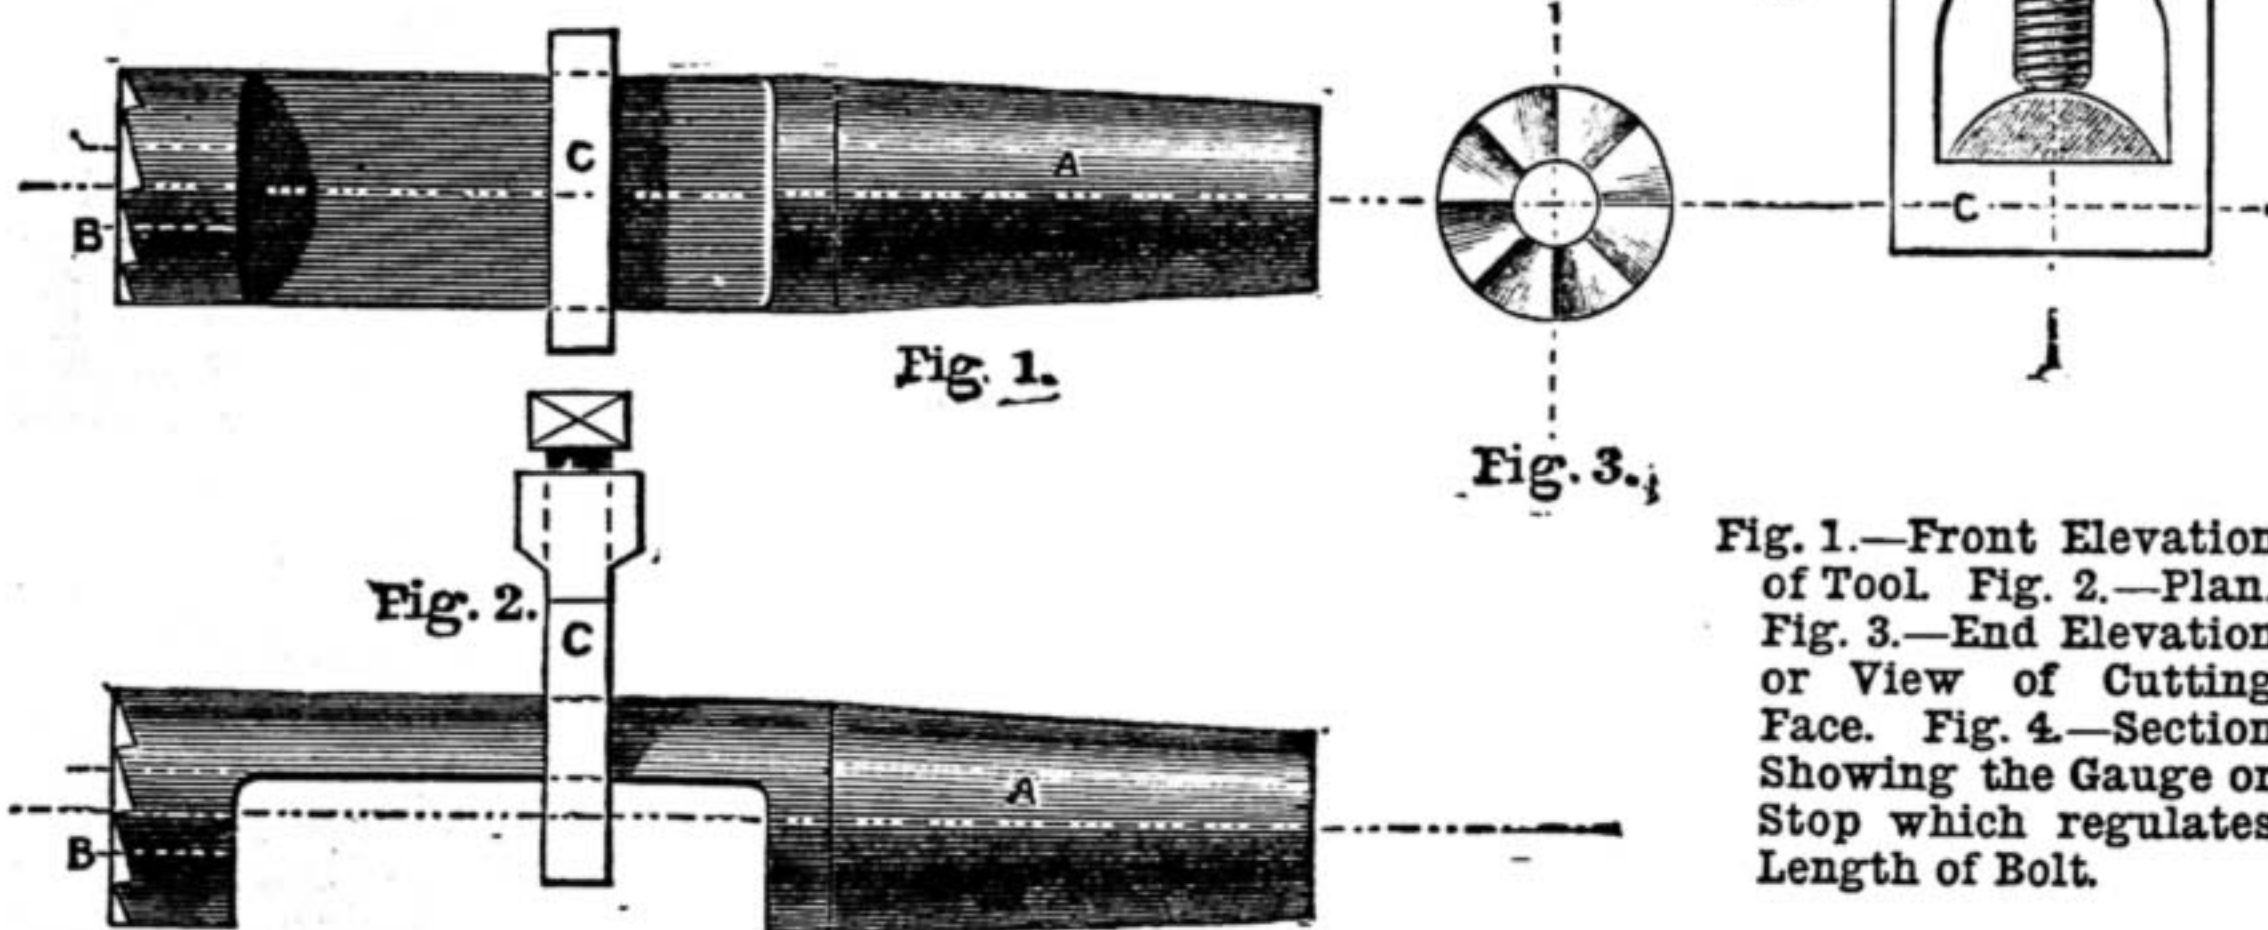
Front Elevation of Tool. Fig. 2.—Plan. Fig. 3.—End Elevation or View of Cutting Face. Fig. 4.—Section Showing the Gauge or Stop which regulates Length of Bolt.
